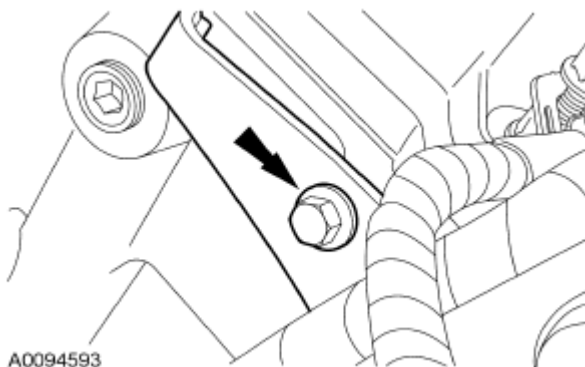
Locating Power Steering Tube Bracket Bolt (2 Of 2)
